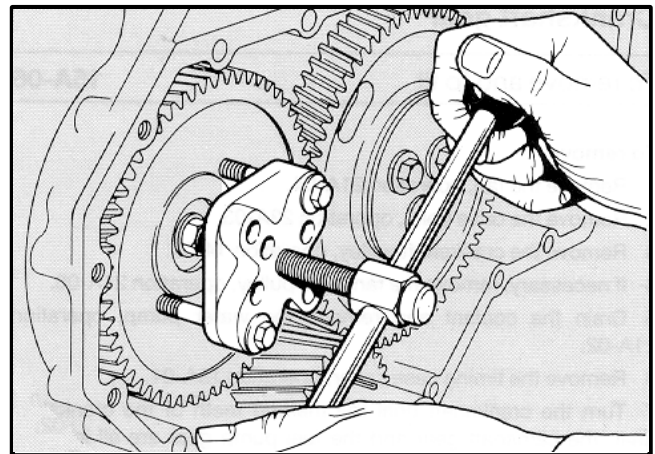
REMOVE THE GEAR FOR THE FUEL INJECTION PUMP
